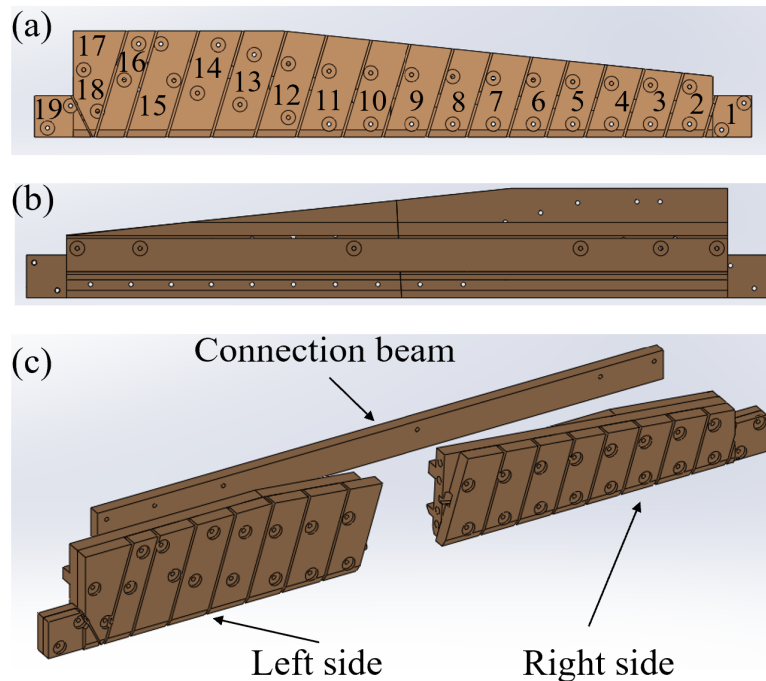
Assembly of magnets holder type I: (a) front view, (b) back view, and (c) exploded isometric view.
